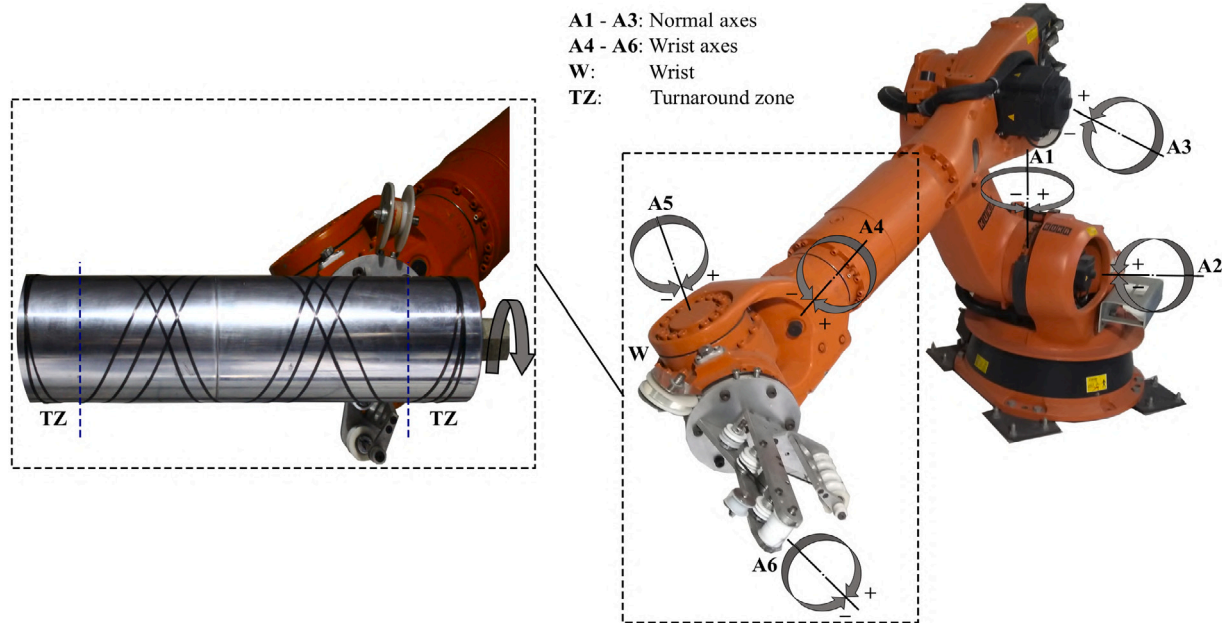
The used Kuka robot and photograph of a VAFW8 cylinder being manufactured.
